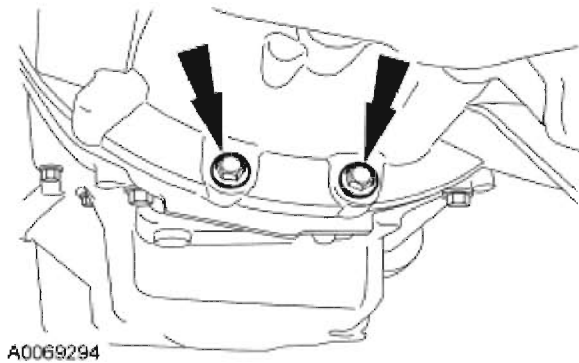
Locating Engine Mount Bracket Bolt
